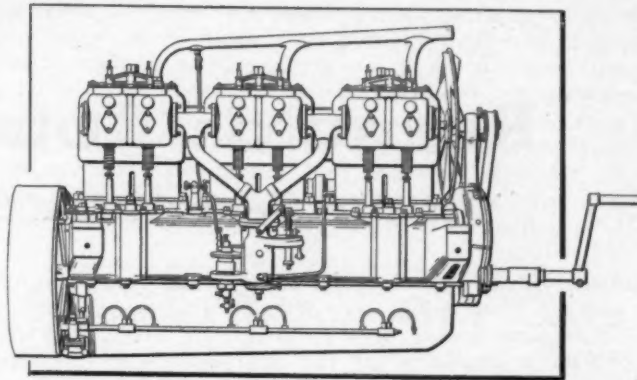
Right-hand side of the 6-60 motor, showing the Stromberg carburetor in the mid position with a special form of manifold leading to the pairs of cylinders
